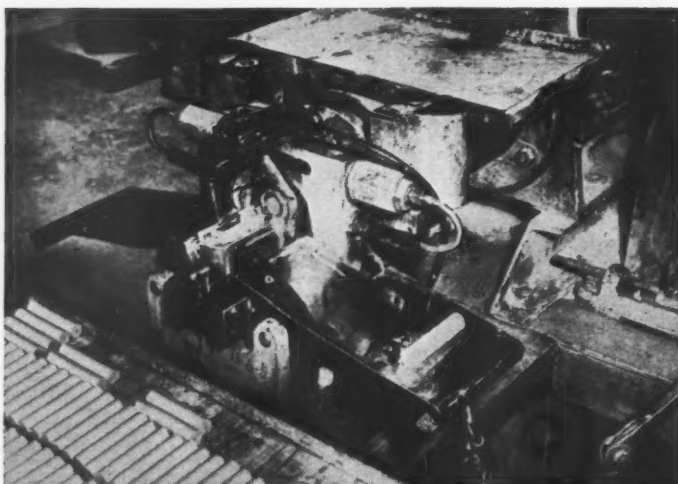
The extrusion process, showing extruded pieces which have been parted off
